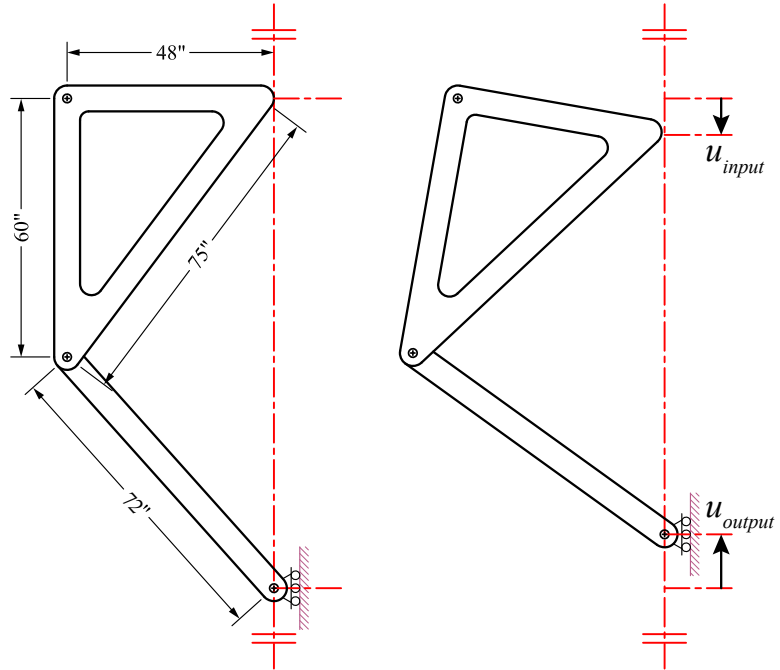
Schematic drawing of the dimension parameters of the loading frame.
